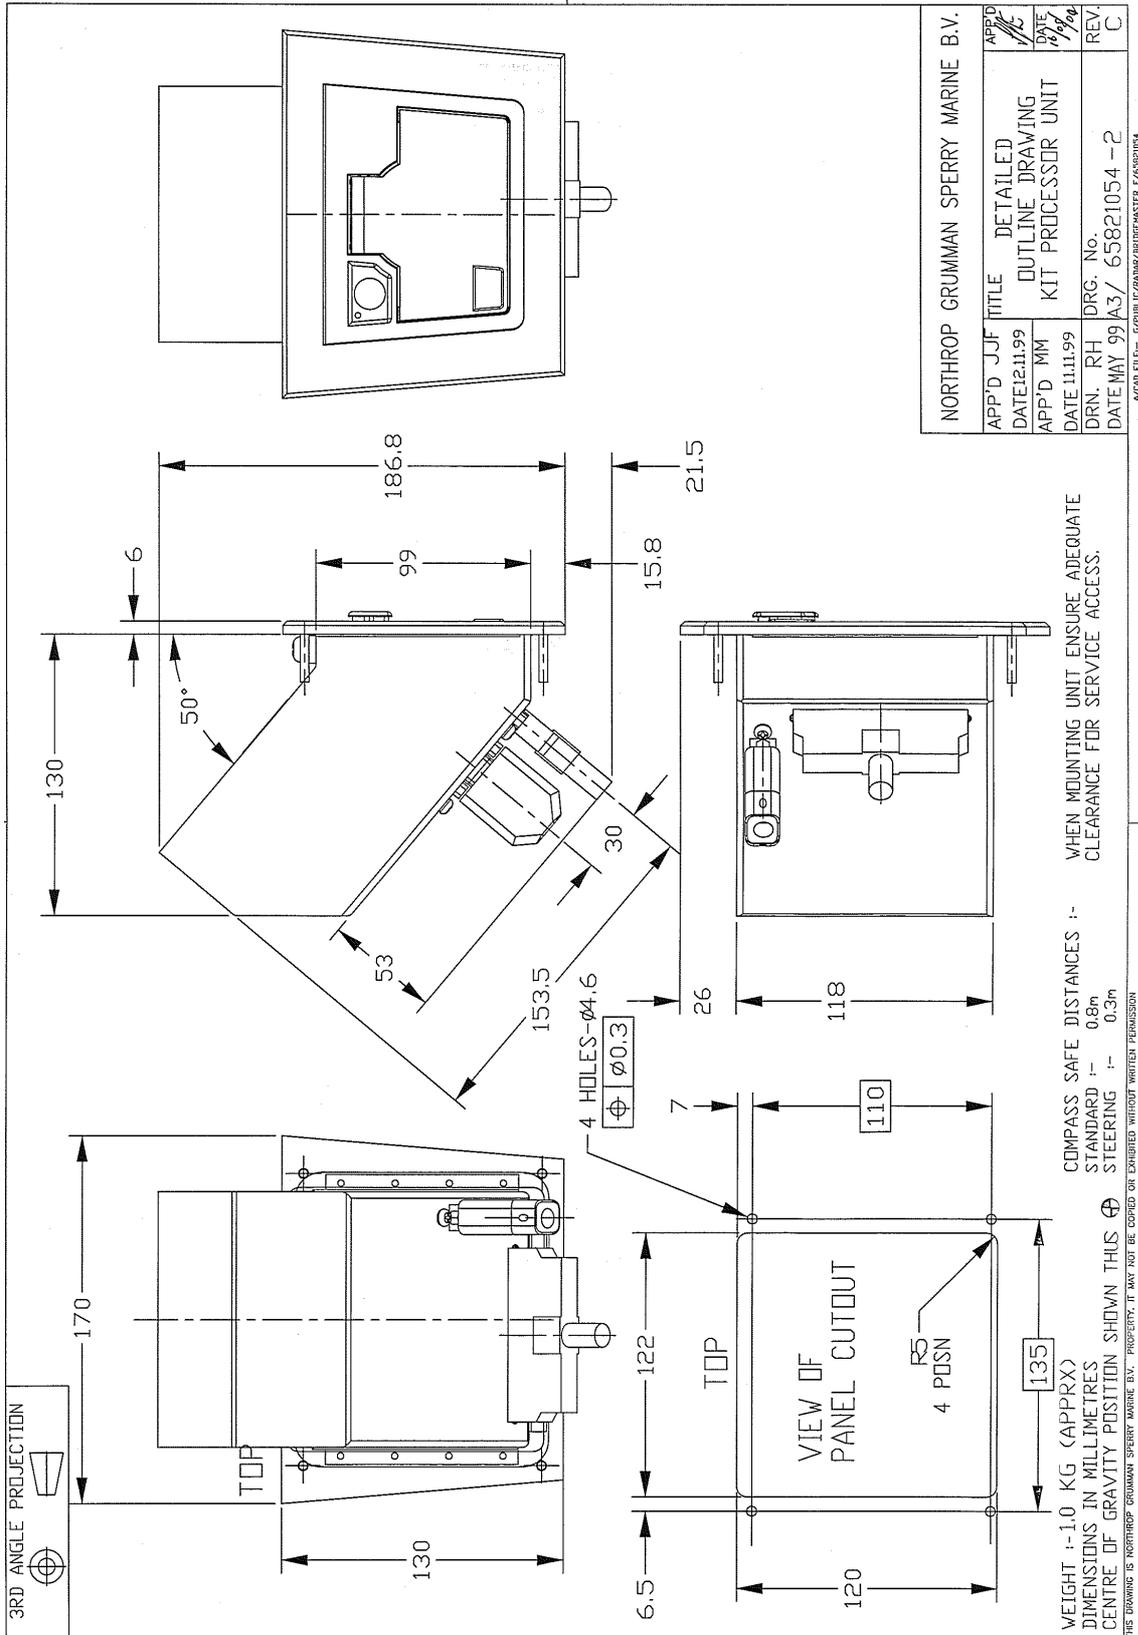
Memory Card Module Outline Drawing (170mm version)
